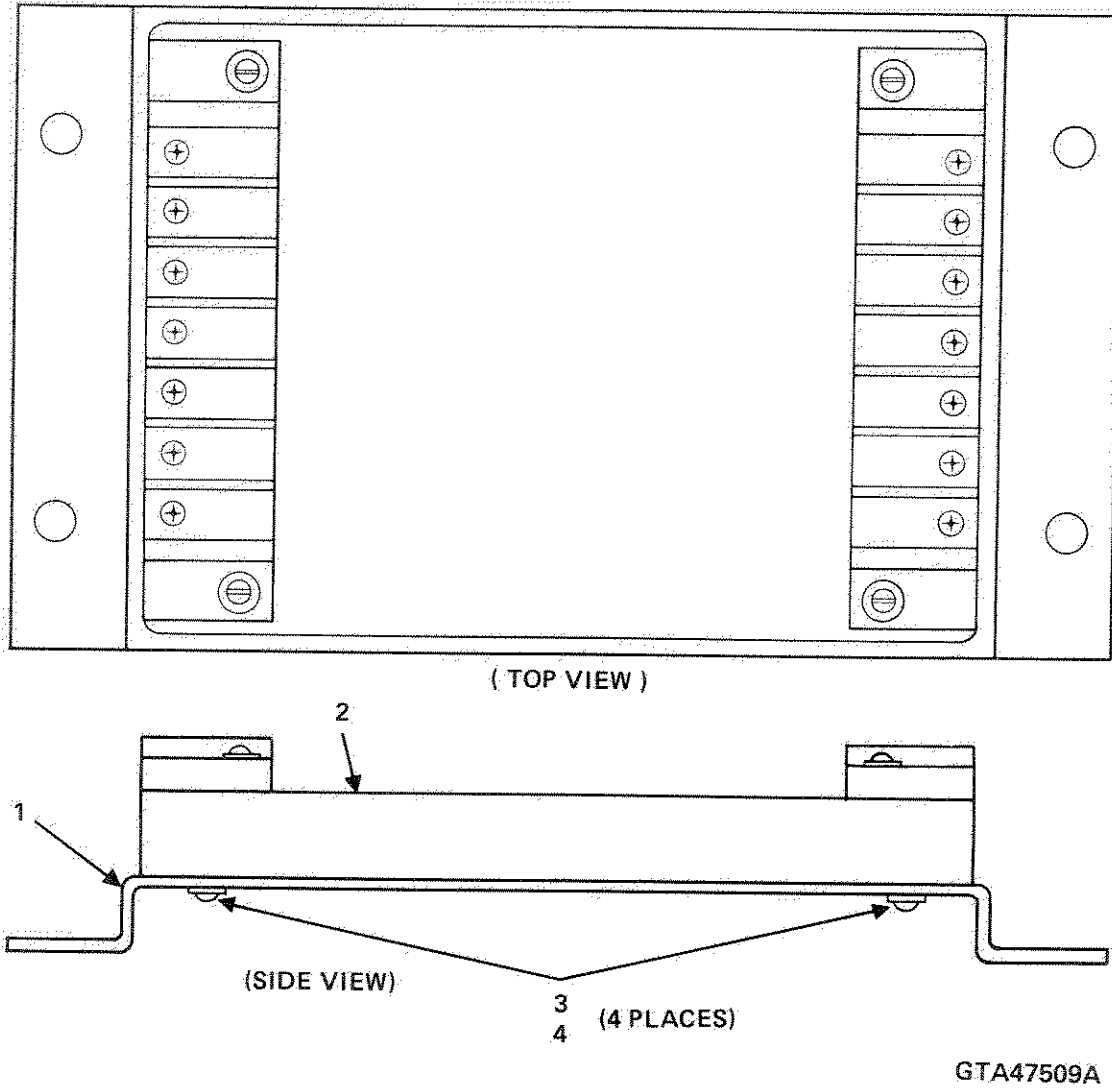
Dc-to-Dc Converter (77C723326G1)
